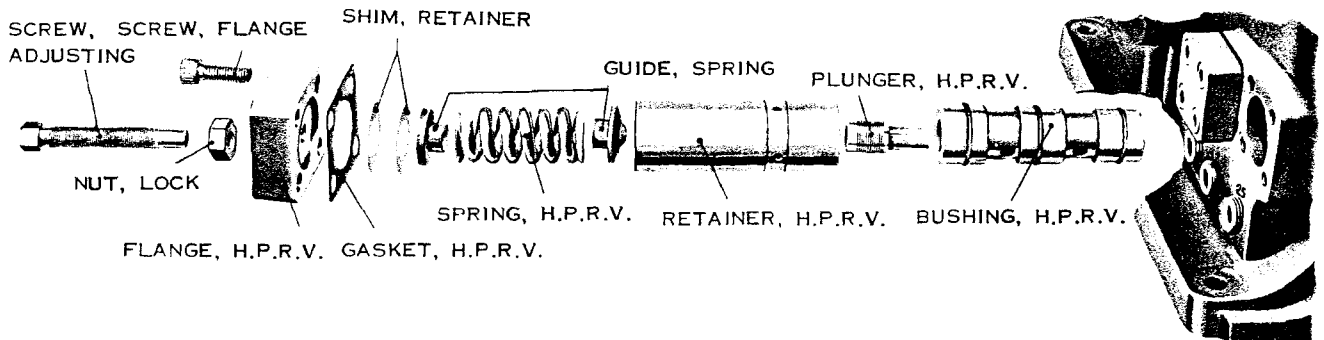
High Pressure Relief Valve, Assembly, Exploded View
